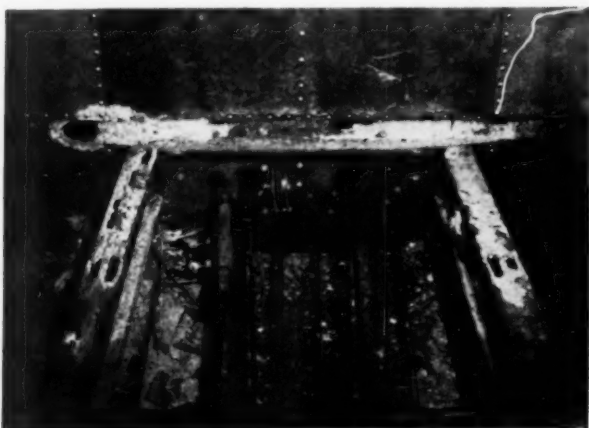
AIRPLANE I: BULKHEAD AND BEAMS IN LAVATORY COMPARTMENT; FUSELAGE STATIONS 538 TO 583
